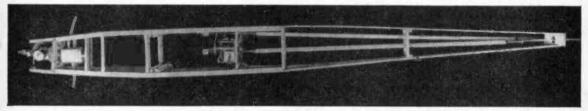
The assembled fuselage with all formers, bulkheads, engine, tank, escapement and torque rods installed. Top and bottom removed for photo.
